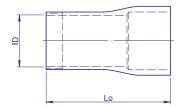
Fig. B Minimum cut length (Lo) for pipe Conical Bell – Cylindrical Spigot
